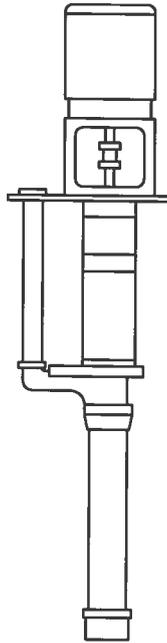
Pump type VS5: Vertical, single volute casing, stiff-shaft cantilever, flexibly coupled to the driver
